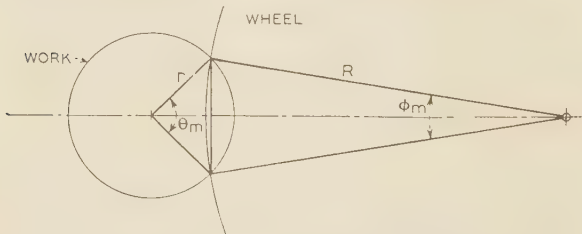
GEOMETRICAL DIAGRAM OF WHEEL CUTTING FIXED CYLINDRICAL WORK
